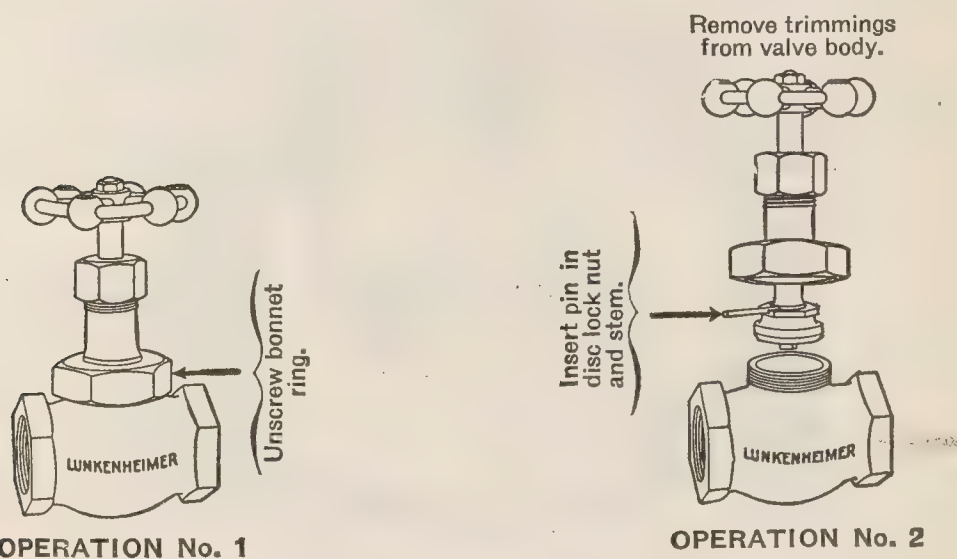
,118.—Regrinding globe valve. *Operation 1:* Unscrew the bonnet ring.
